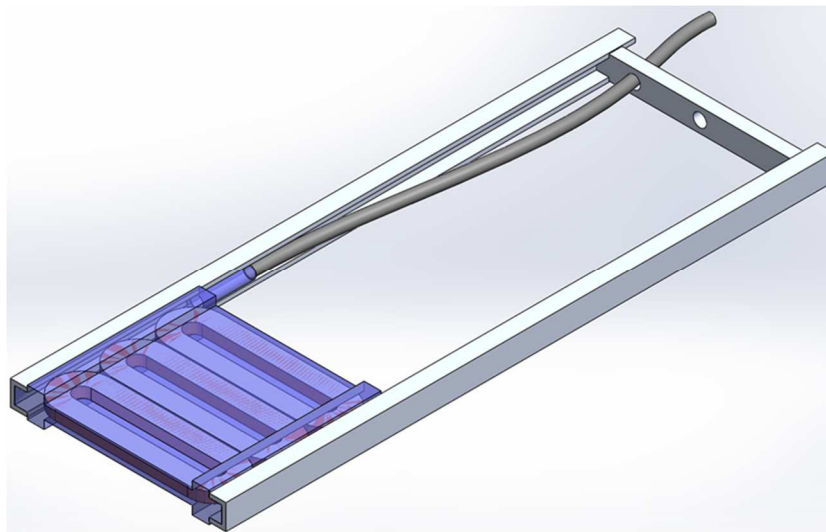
Three coil epoxy potted translator blade sample, CAD assembly
